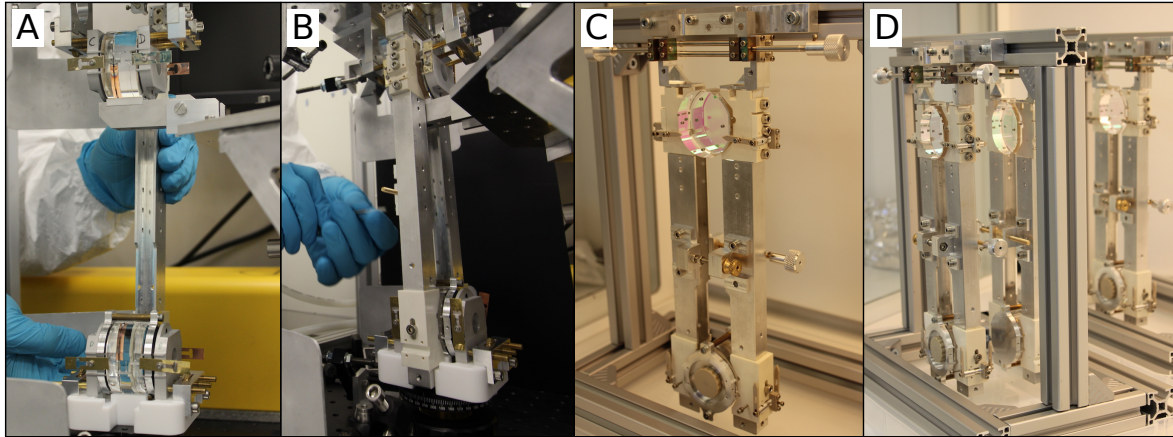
Pictures during extraction of the monolithic assemblies from the weld tool. Picture A shows the introduction of one side of the fibre guards. In Picture B the attachment of the central guard opener to the fibre guards is shown. Pictures C and D show finished monolithic assemblies in their fibre guards mounted in a storage and transport container.
